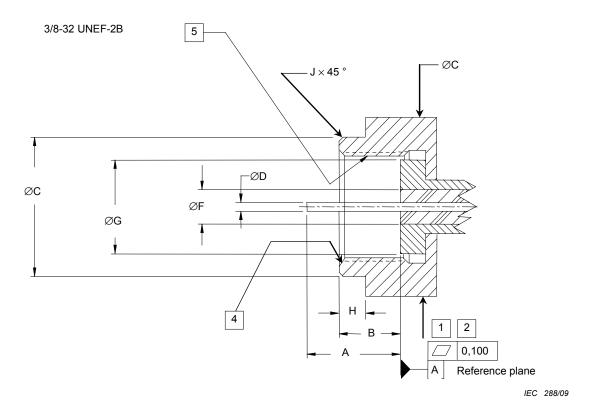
Outdoor "F" type male plug (for dimensions, see Table A.2)
